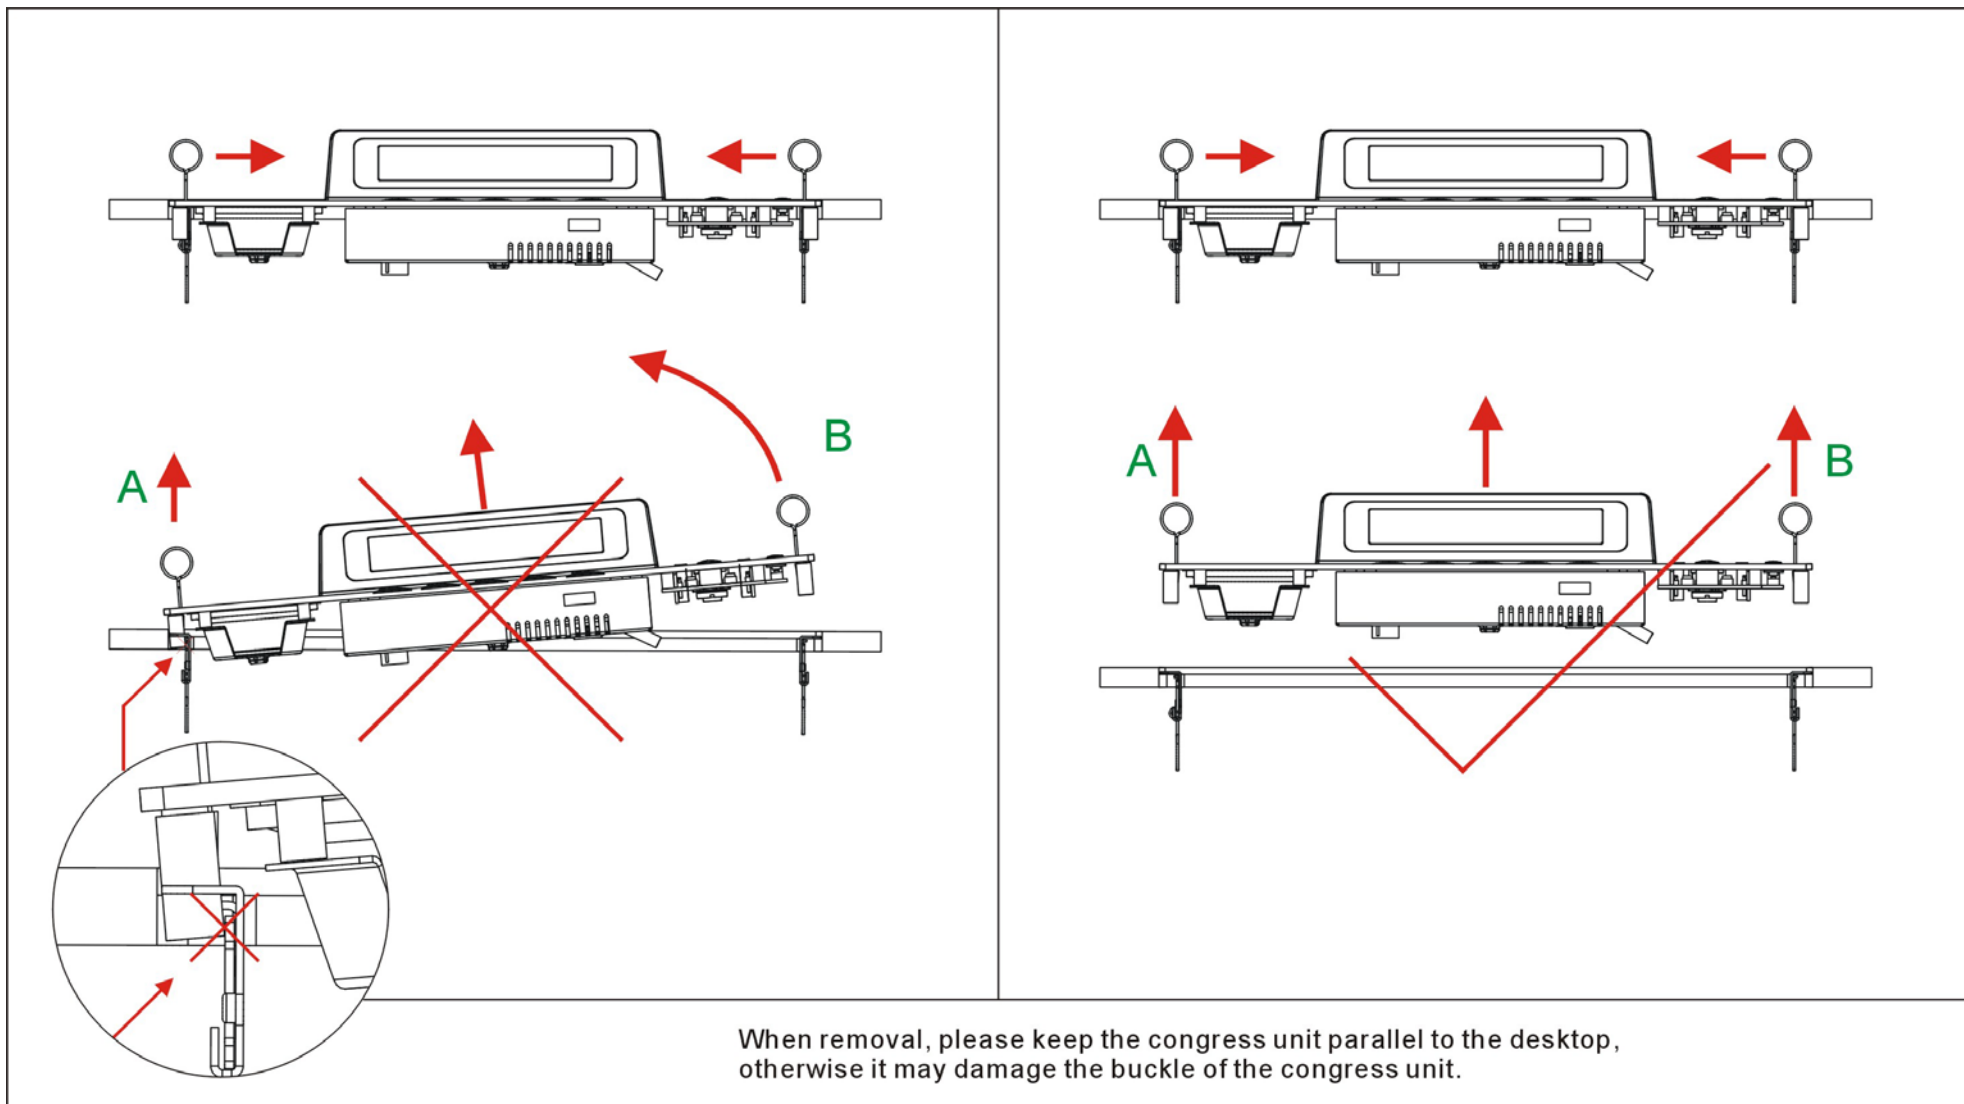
Disassembly caution of HCS-48U8 and HCS-48U9 series flush-mounted congress unit
